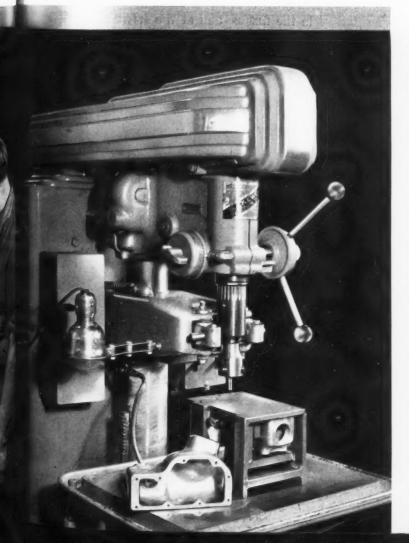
(Below Left) Precision Tapping Operation in which an Irregular-shaped Part is Readily Handled by a Simple Jig
